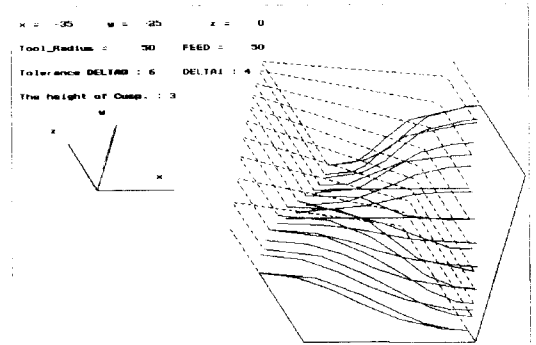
(b) Tool path simulation for machining of defined sculptured surface
